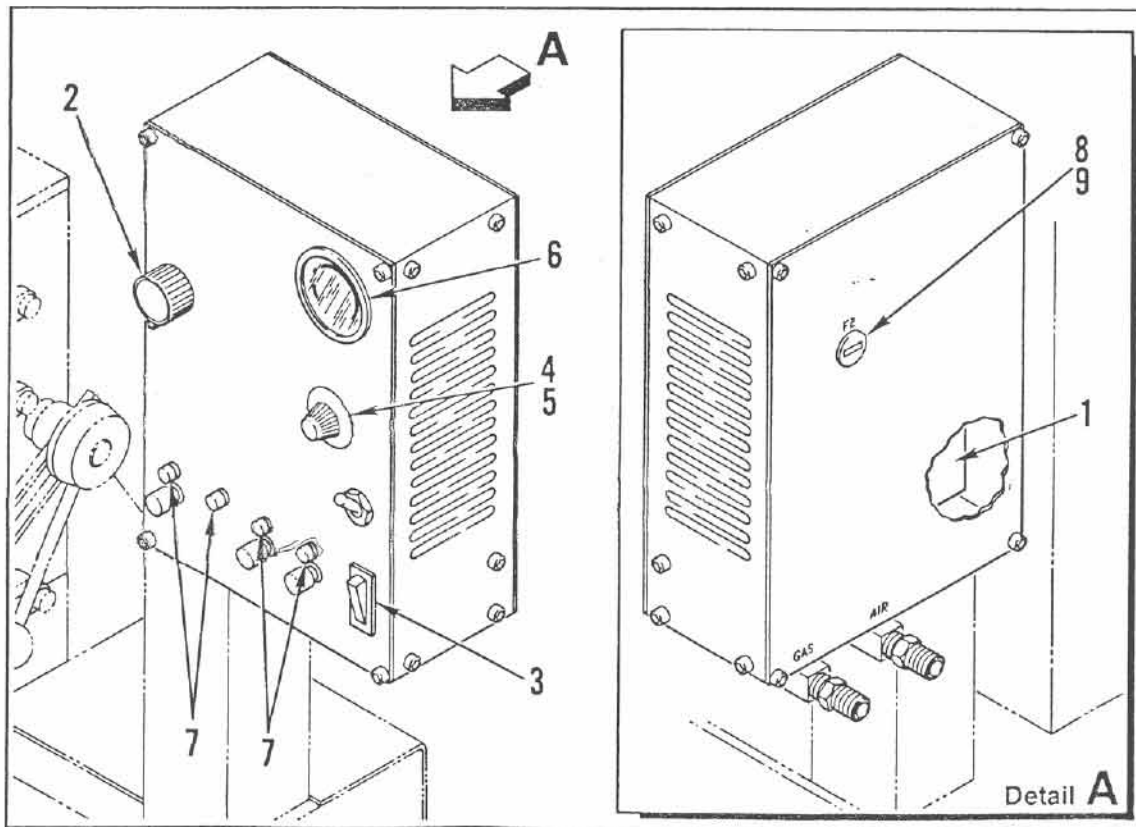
REPLACEMENT PARTS FOR PACE CRAFT-100A CONTROLLER ASSEMBLY
